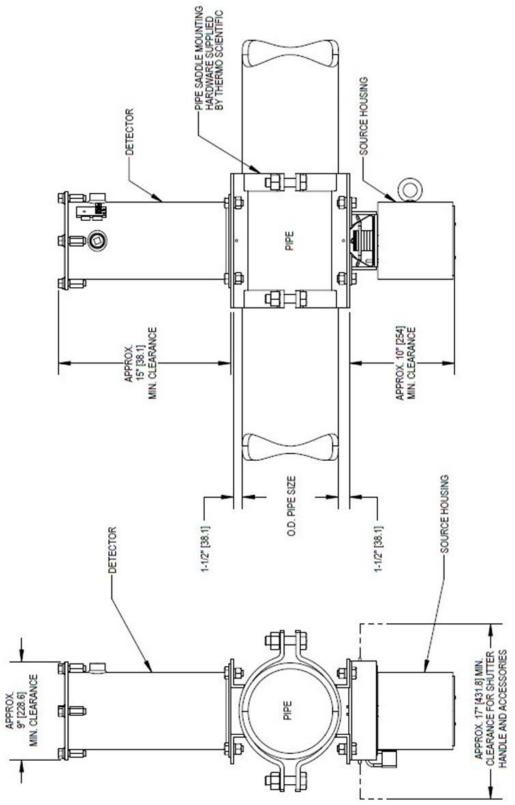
4-0700-147: Installation drawing, remote system detector with NEMA 4X housing
